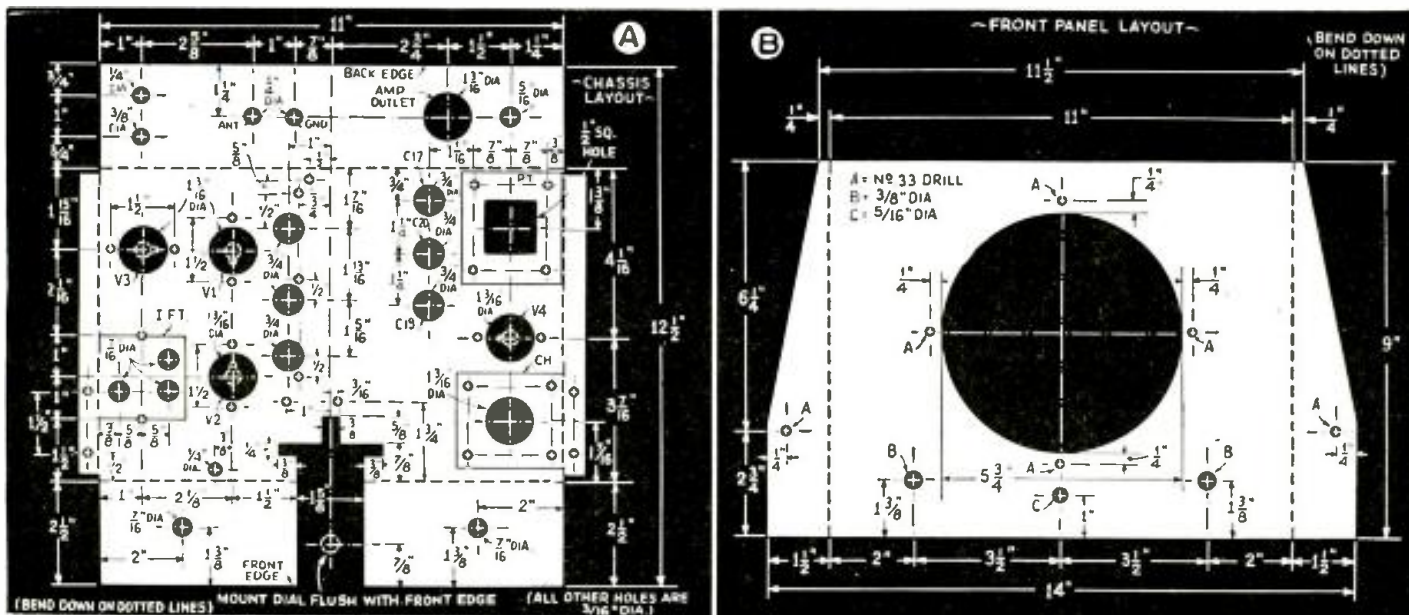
The chassis drilling and forming layout and the panel drilling details. The mounting holes must be changed if substitute parts are used.
